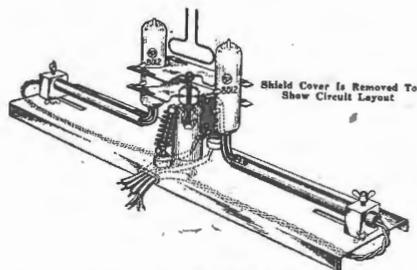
This drawing illustrates the layout of components used in the circuit shown in Fig. 6. —Courtesy R.C.A.
